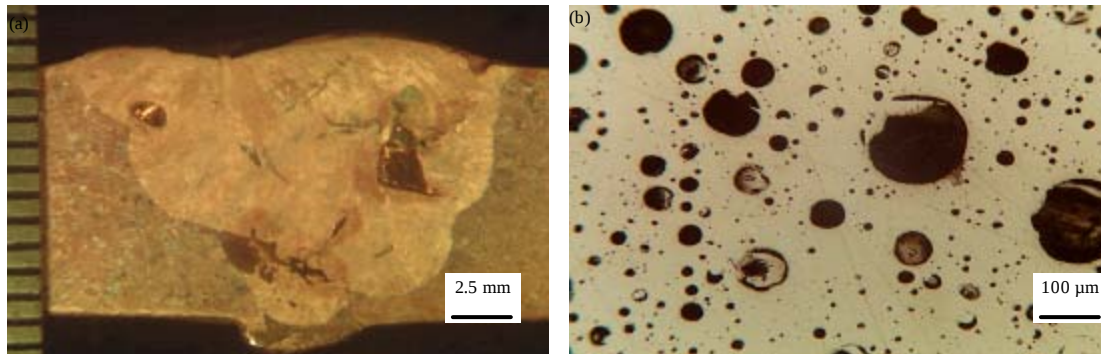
(a-b): Profiles of joint using HS201 By N₂-Ar shielding arc welding, (a) Cross-section of the welds and (b) Nitrogen porosity
